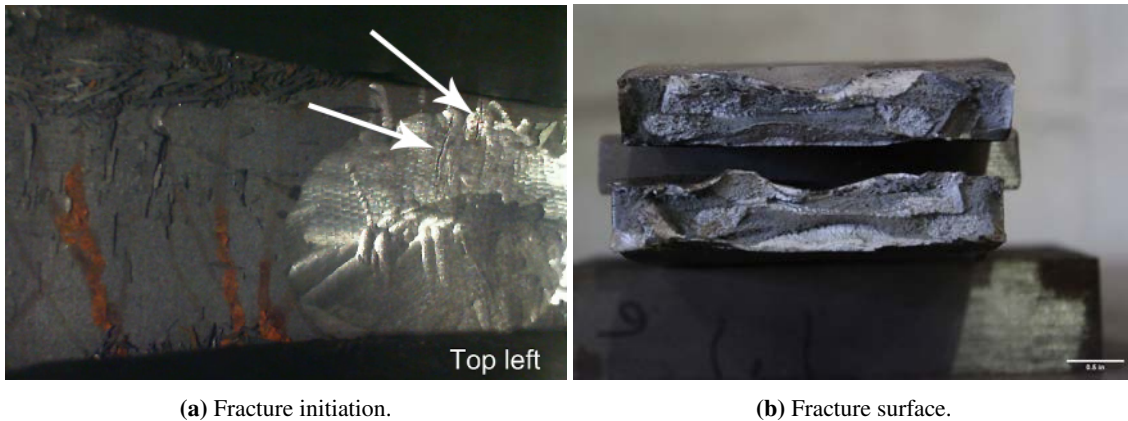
Fracture of a plate specimen with 0.125 in. notches repaired by grinding.
